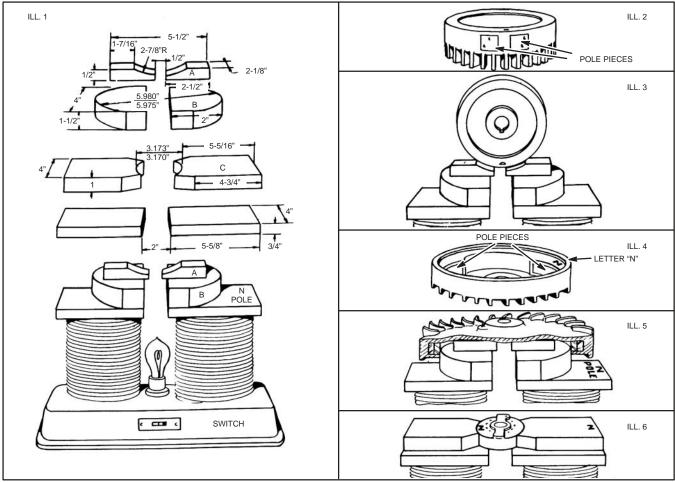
MAGNETIZING FLYWHEELS & ROTORS
